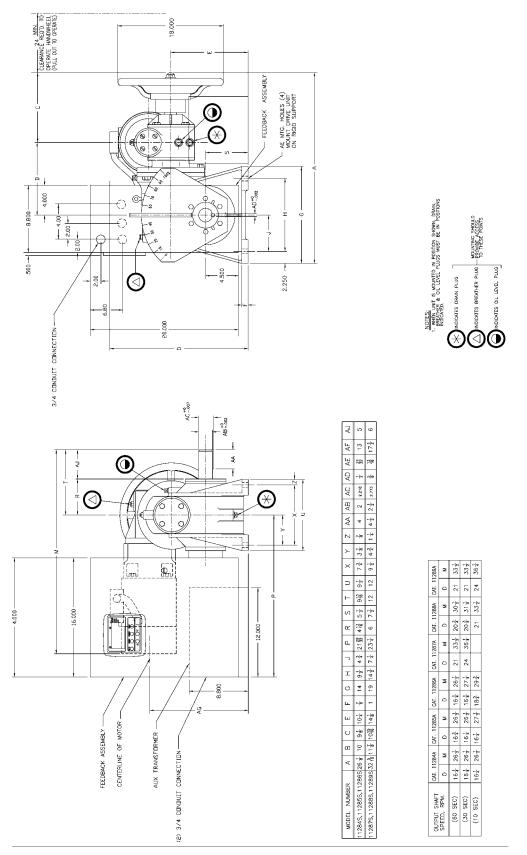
Mounting and Outline Dimensions for 11284S, 11285S, 11286S, 11288S, and 11289S
